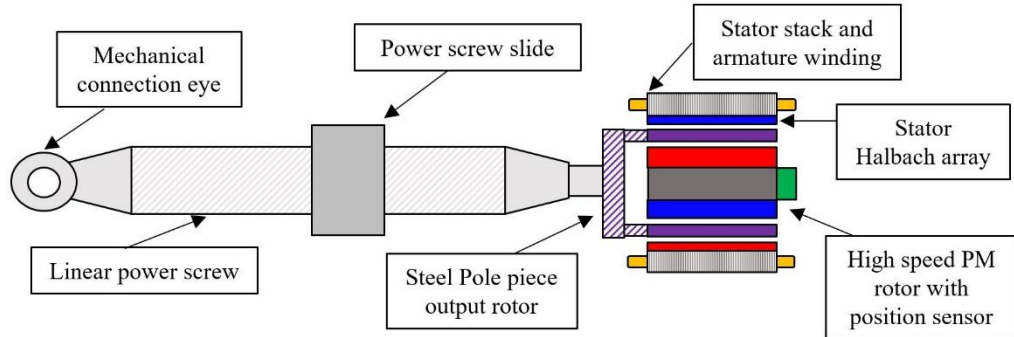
Electromagnetic mechanical actuator system - EMMAS
